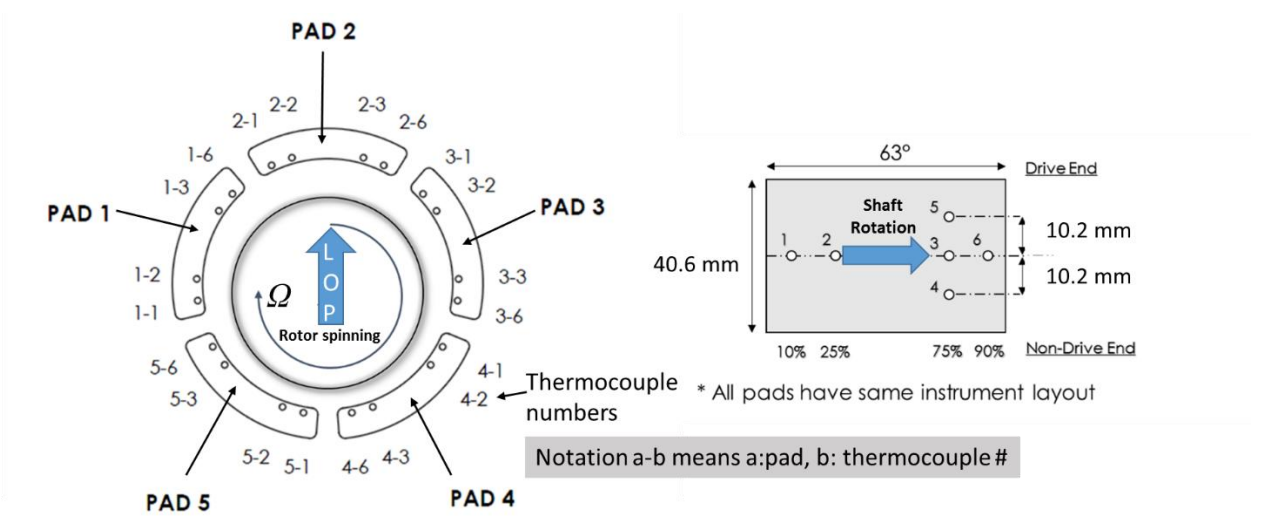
Bearing pads' thermocouple layout in the circumferential and axial directions.
